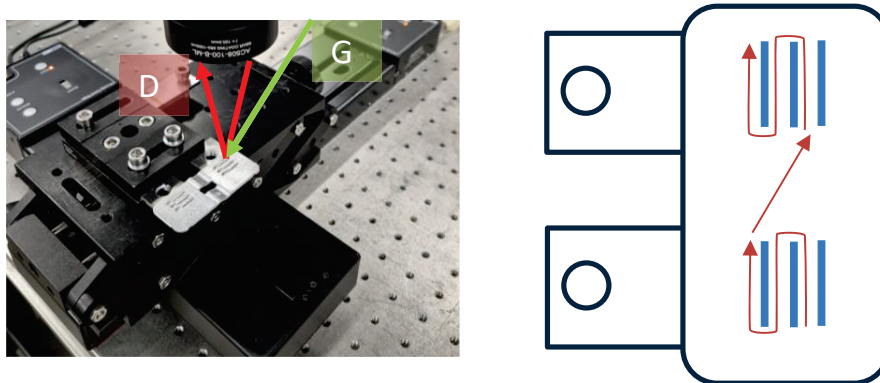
Setup for measurement on welded battery tabs. (left) the setup showing the generation laser G and detection laser D; (right) the scan performed on each sample, the red lines showing the position of the detection laser.
